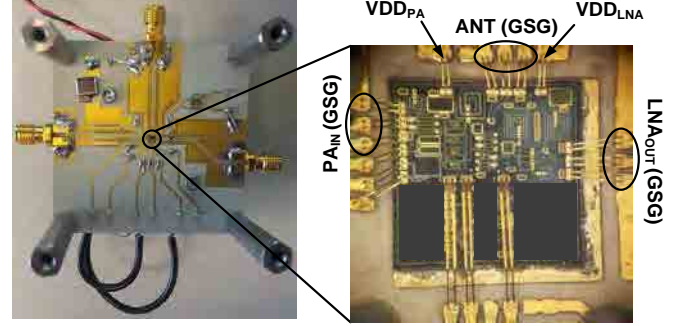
PCB and Chip-On-Board (COB) Implementation
